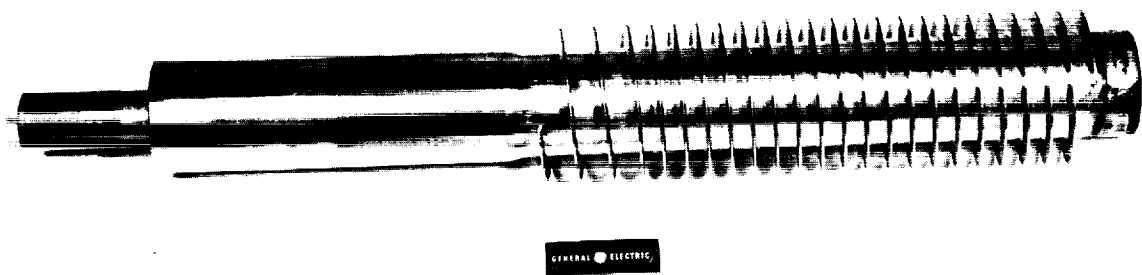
Welded Assembly of T-111 Helix, Helix Extension, and Center Return Pipe for EM Boiler Feed Pump.
